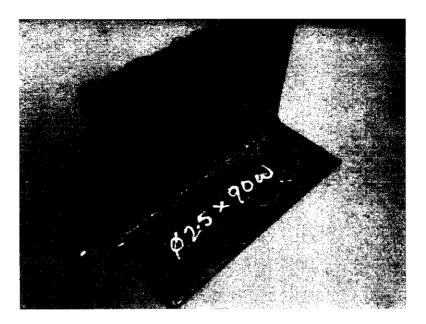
Welded plate with welding voltage, 90V (PLATE 1)
